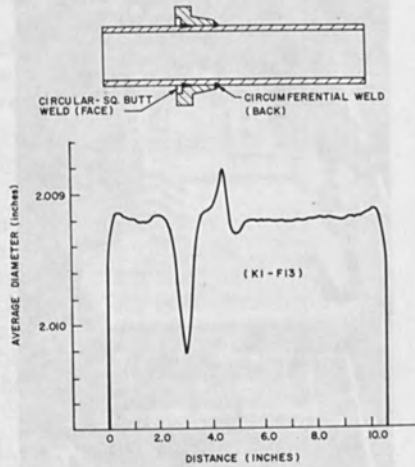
E.B. weld distortion profiles (51mm).
